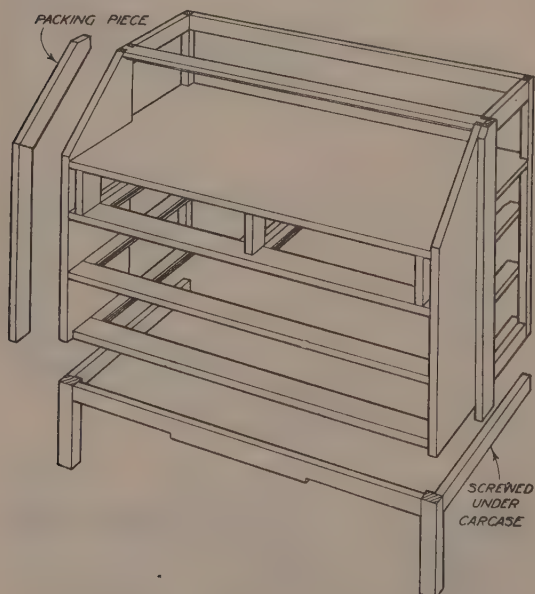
SKETCH OF THE BUREAU CARCASE.
